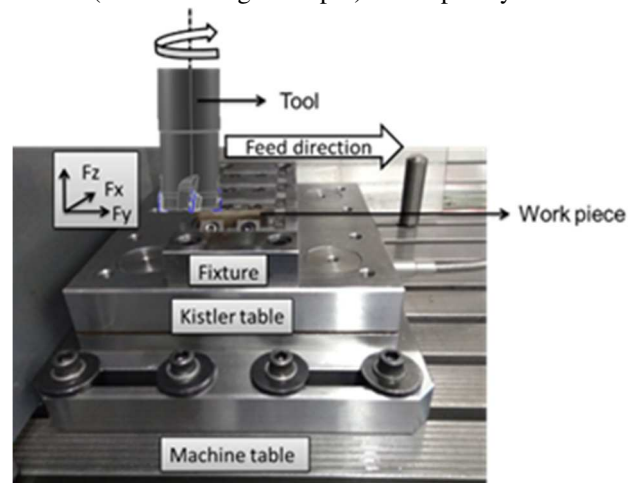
Machining set-up with the KISTLER dynamometer table (type 9255B).
